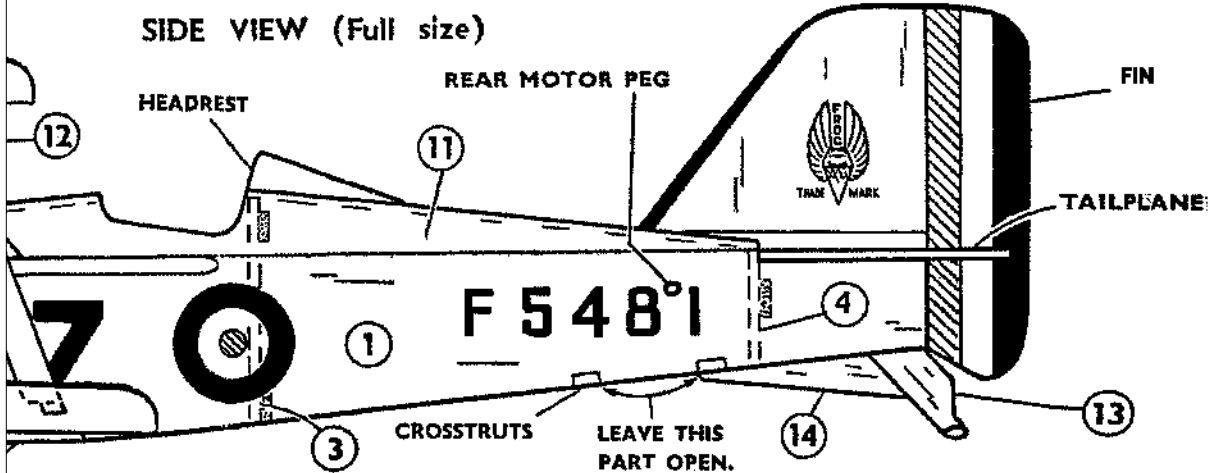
FUSELAGE SIDES ASSEMBLED TOGETHER.
